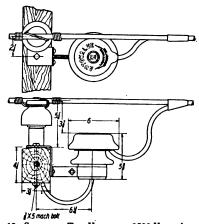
Side and Top Views of 2500-Volt Arrester with Form T Mounting Bracket
